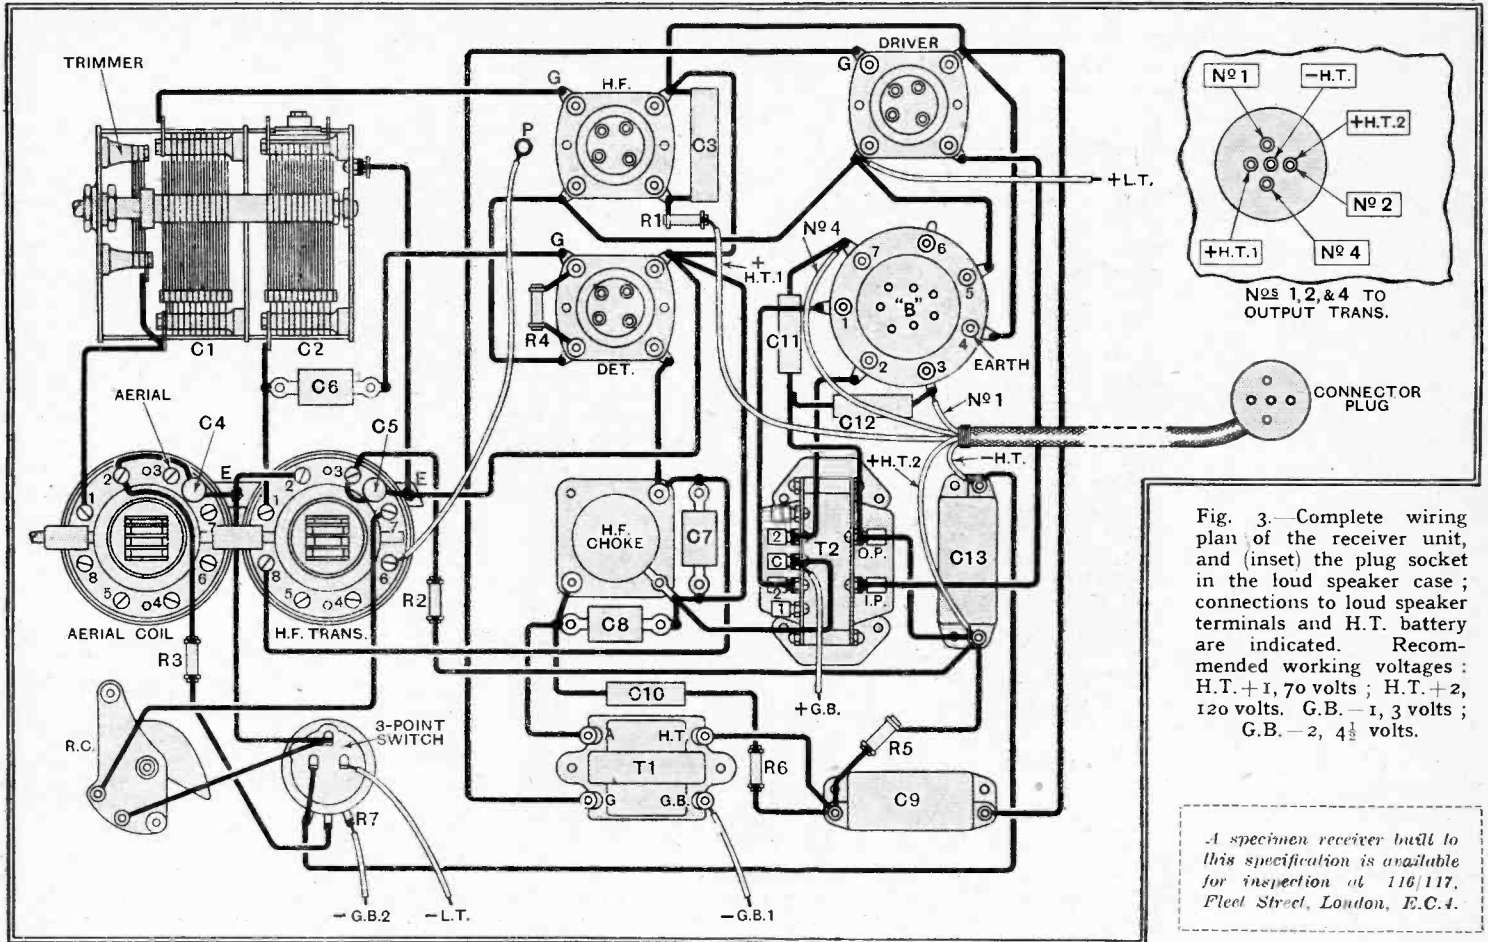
Complete wiring plan of the receiver unit, and (inset) the plug socket in the loud speaker case; connections to loud speaker terminals and H.T. battery are indicated. Recommended working voltages: H.T.—1, 70 volts; H.T.—2, 120 volts. G.B.—1, 3 volts; G.B.—2, 4½ volts.
